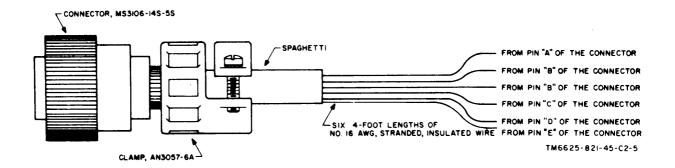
Fabricated cable for the BEARING INDICATOR, construction details.
